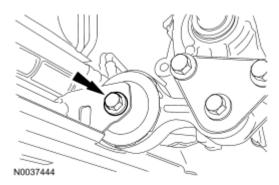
Locating Engine Roll Restrictor Bolt Courtesy of FORD MOTOR CO.
